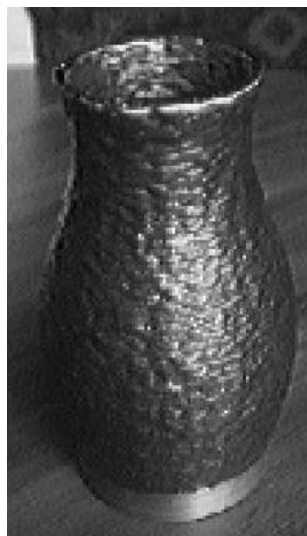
First successful integration of CAD and welder controls [23,24]
